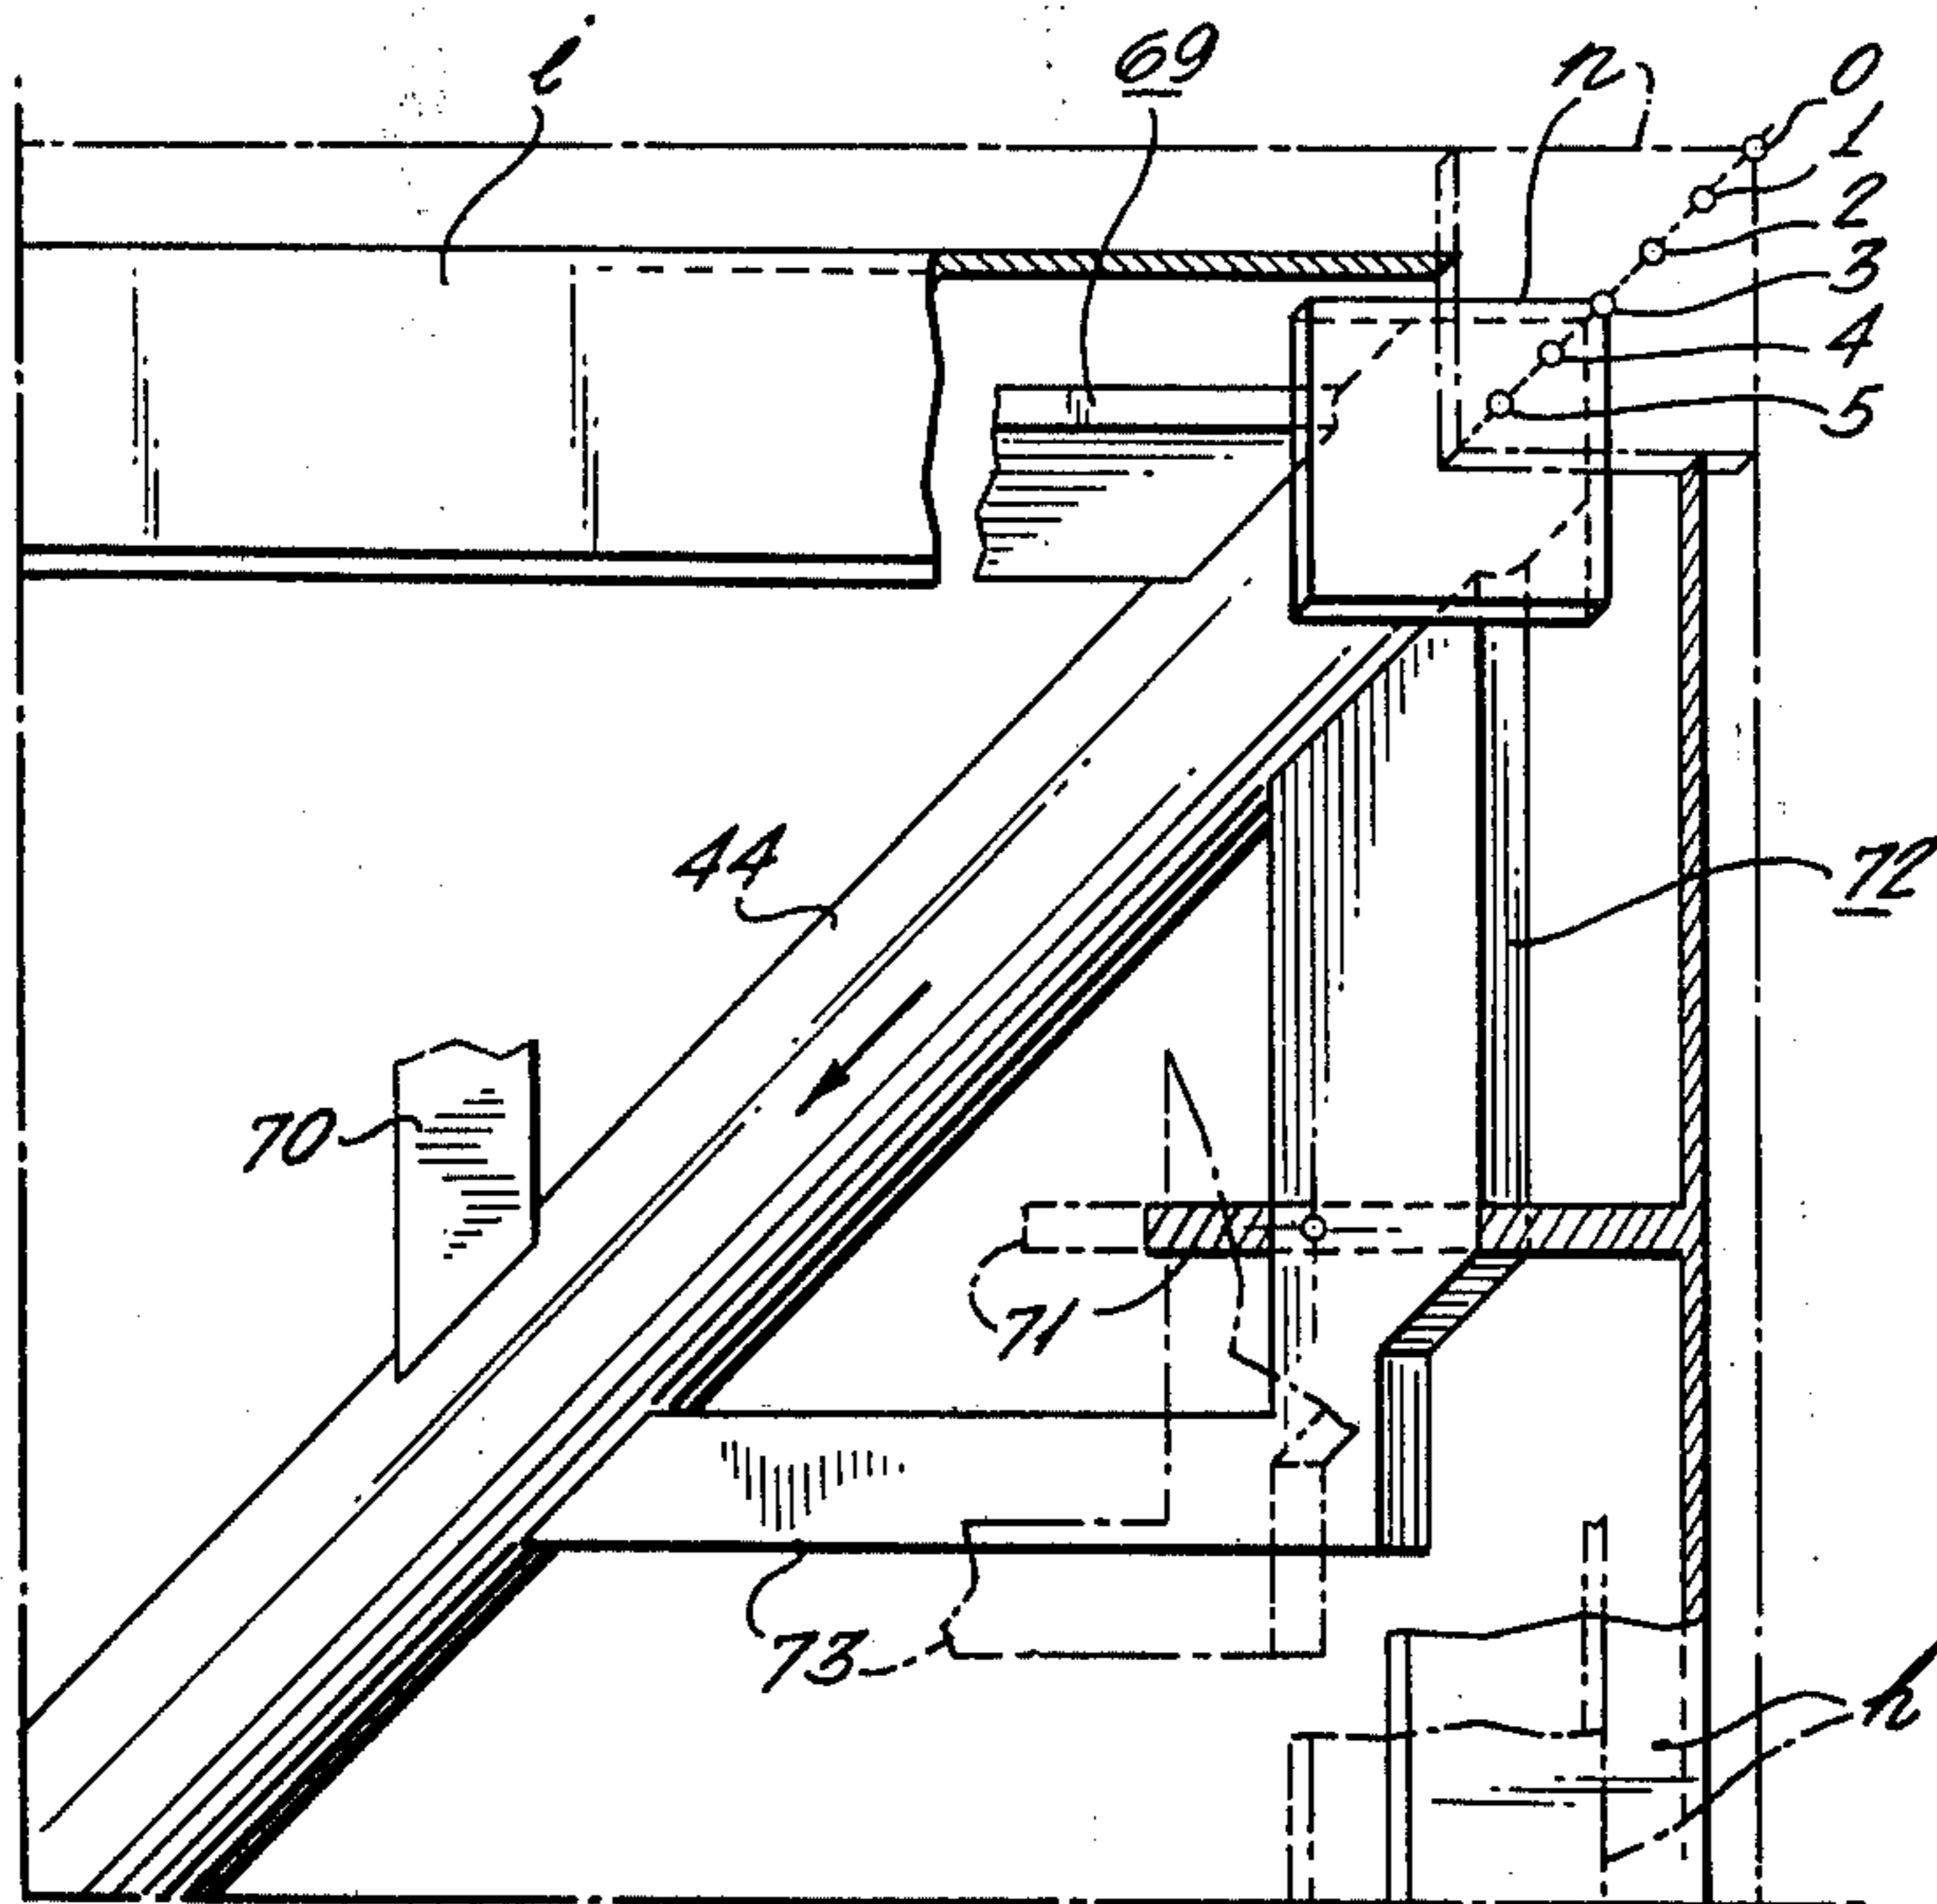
PLAN VIEW, ROD 44 FULLY EXTENDED, POSITION #0
